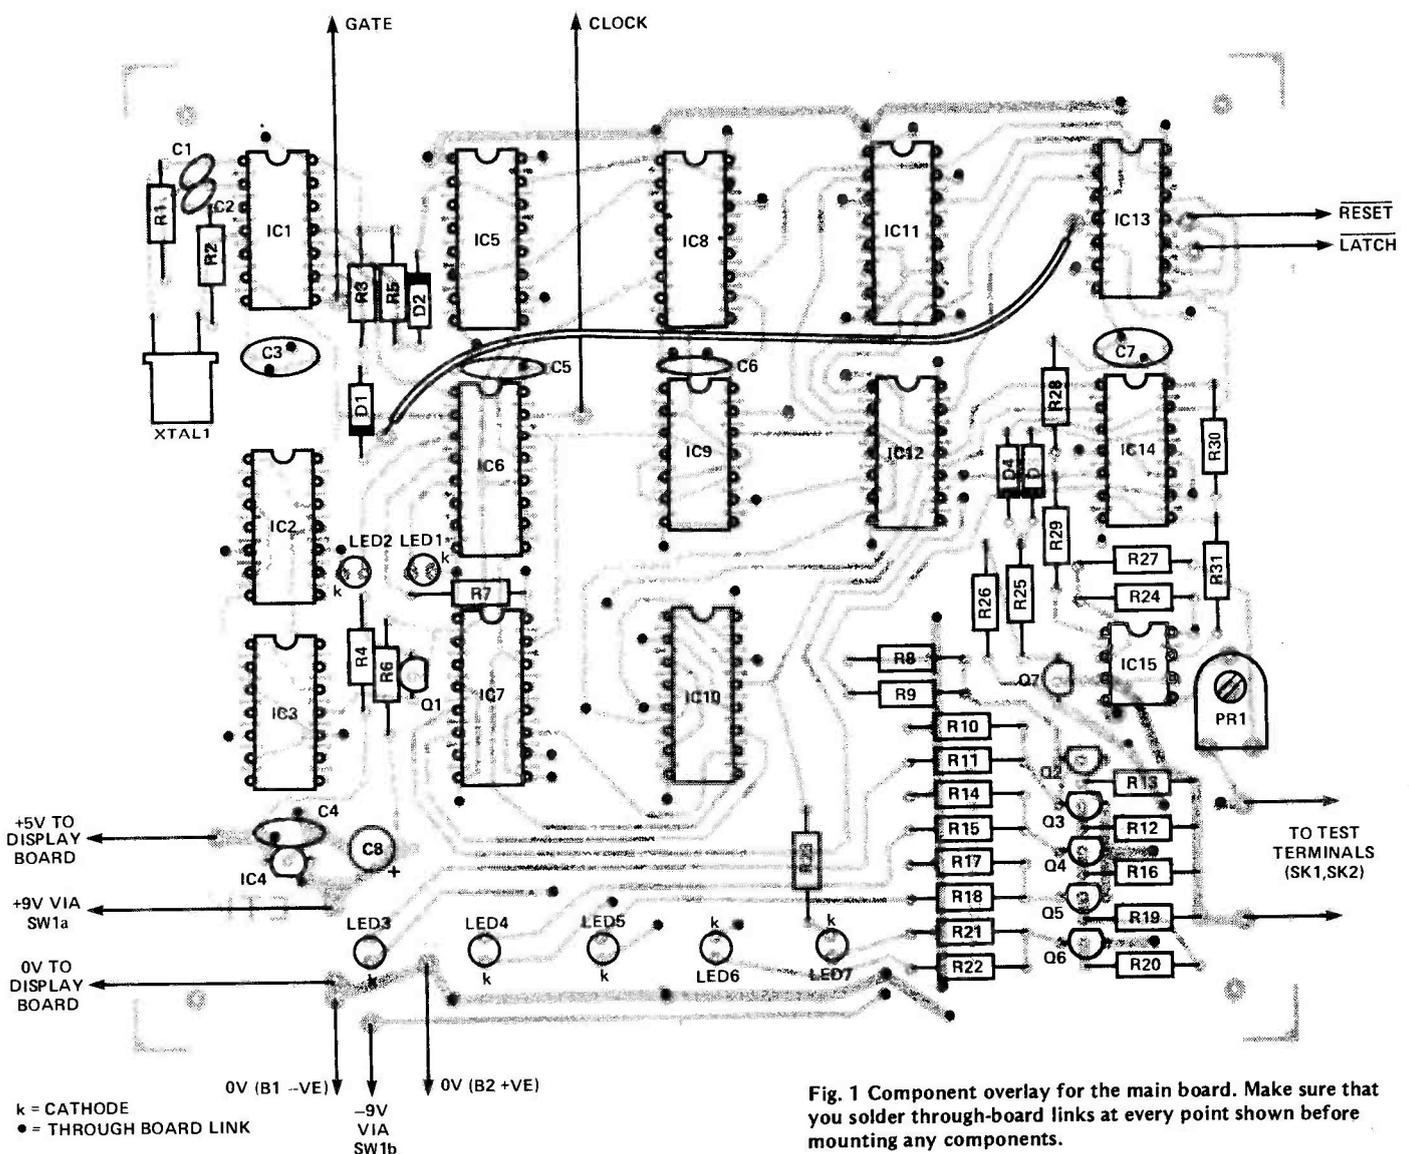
Component overlay for the main board. Make sure that you solder through-board links at every point shown before mounting any components.
